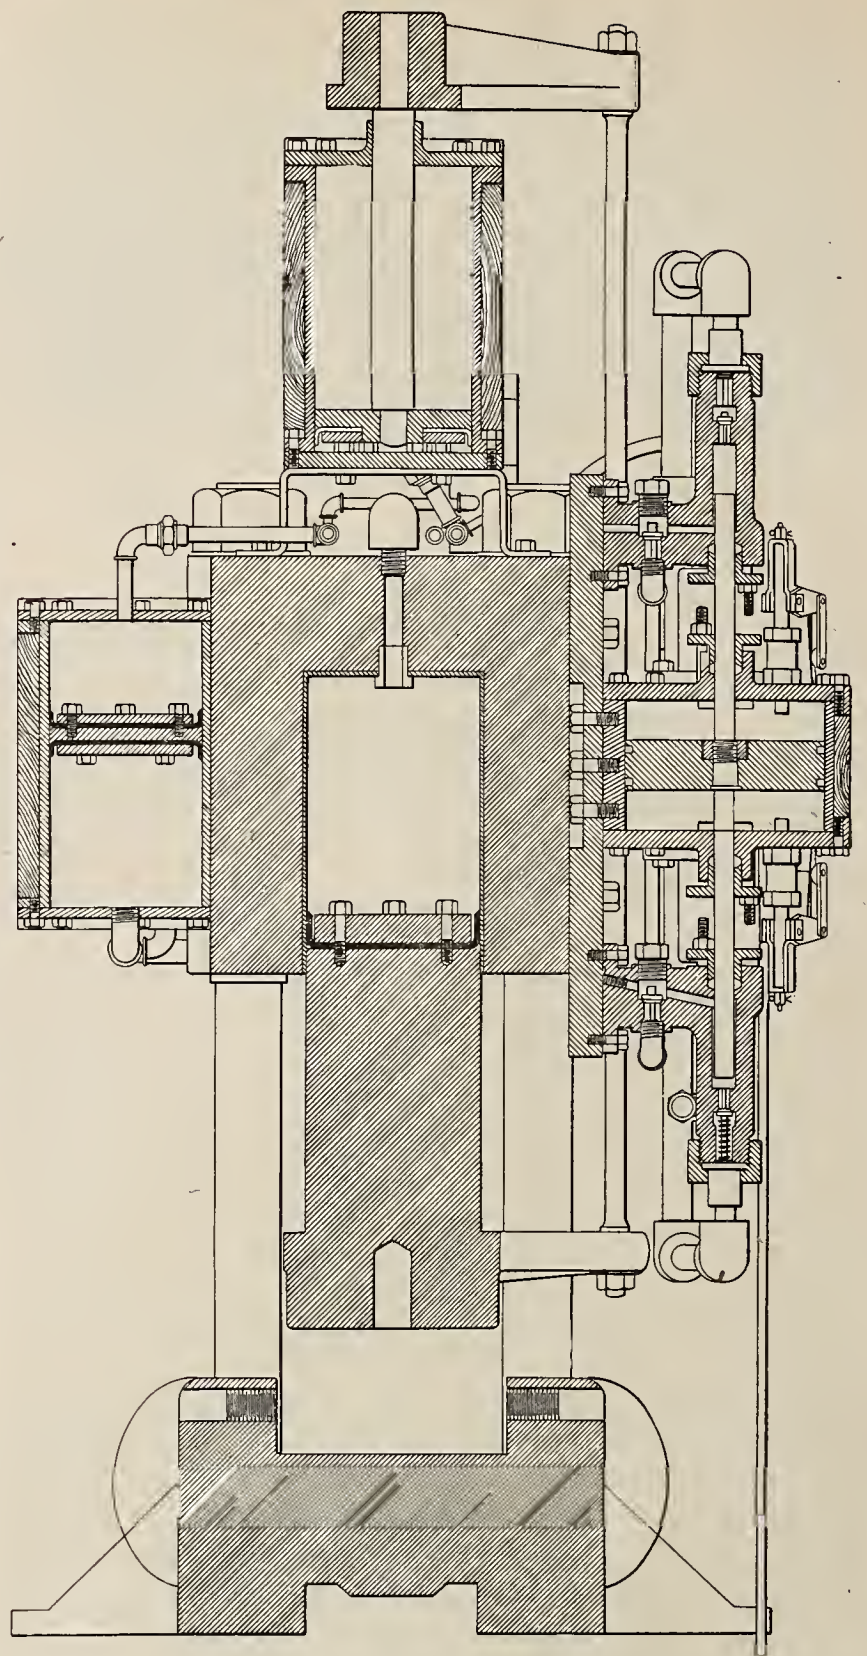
FORGING AND COUPLER POCKET MACHINE.
